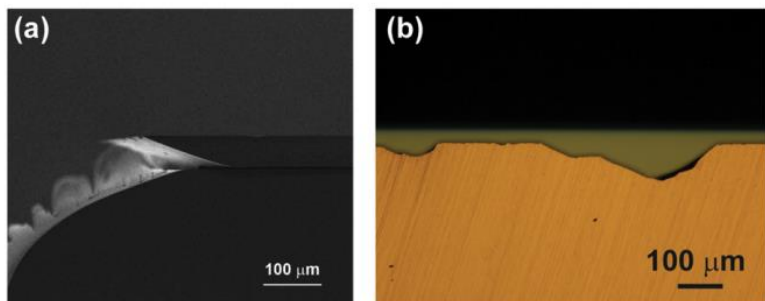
(a) Cross-sectional SEM image of bonded wafer edge after top wafer grinding towards 50 μm thickness without edge trimming (b) Top OM view of wafer edge after grinding without edge trimming.
